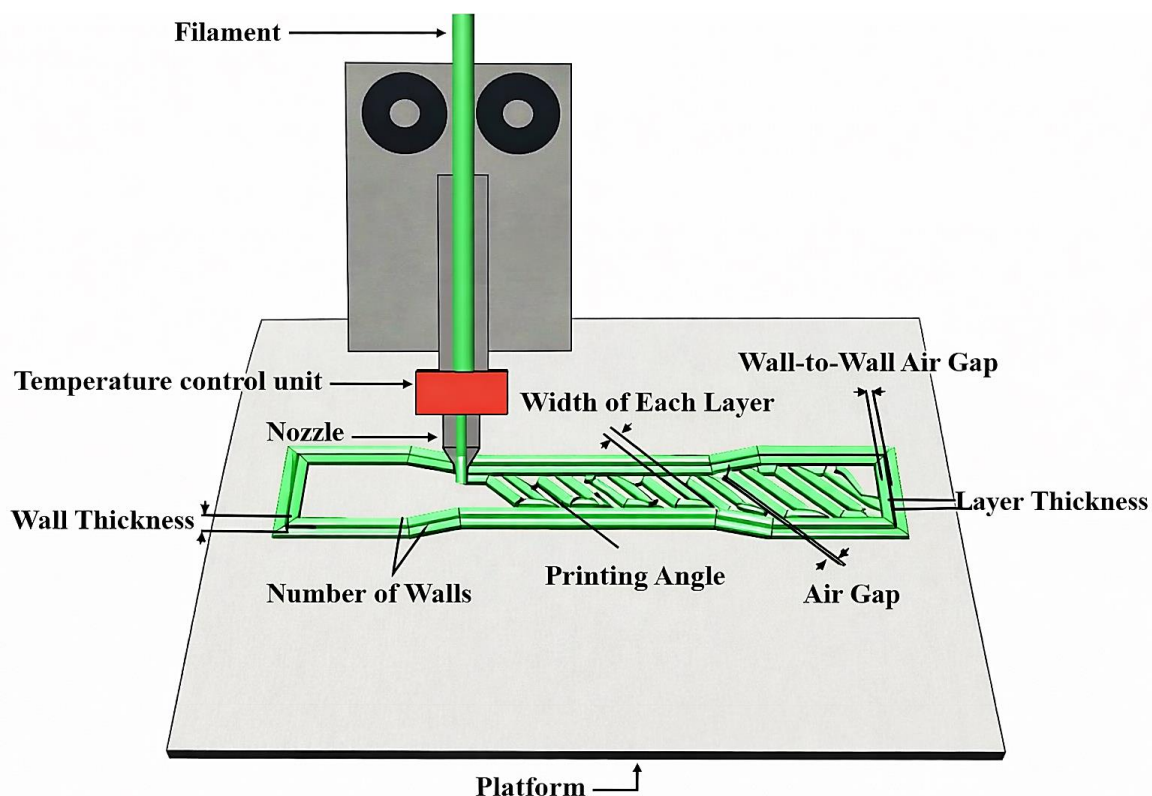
Schematic and process parameters of a FDM 3D printer [18].
